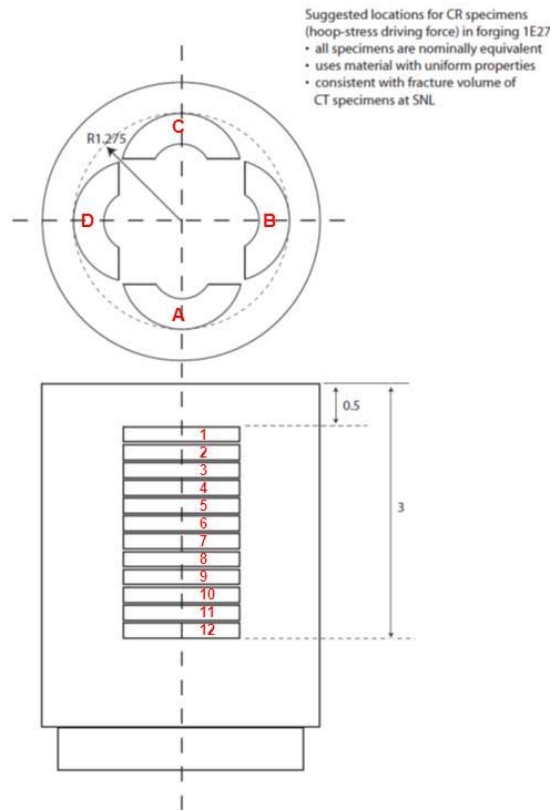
Fracture Toughness Specimen Location and Orientation For Type 304L Cylindrical Block Forging.
